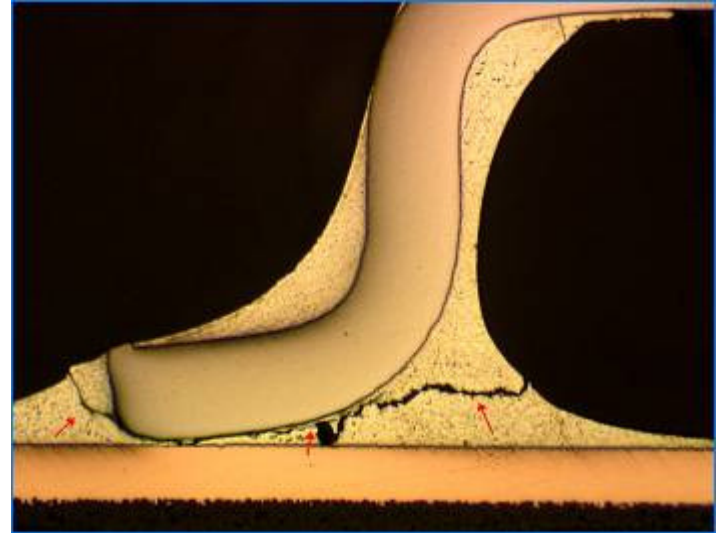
cross section, SN67, U61, left lead solder crack, 100x
